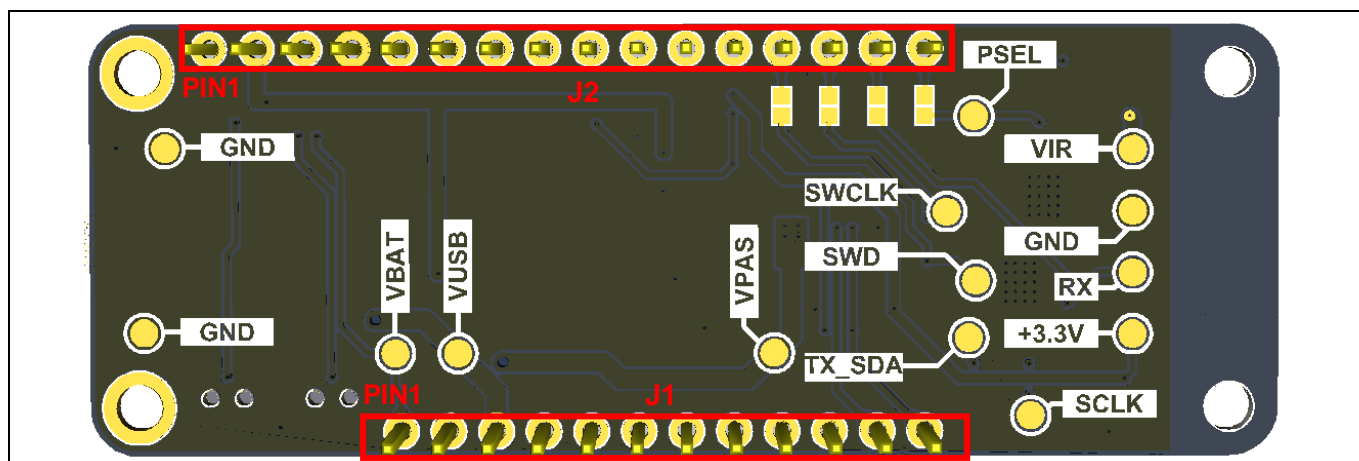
Adafruit headers and test points on bottom of the XENSIV™ PASCO2V15 Wing board
